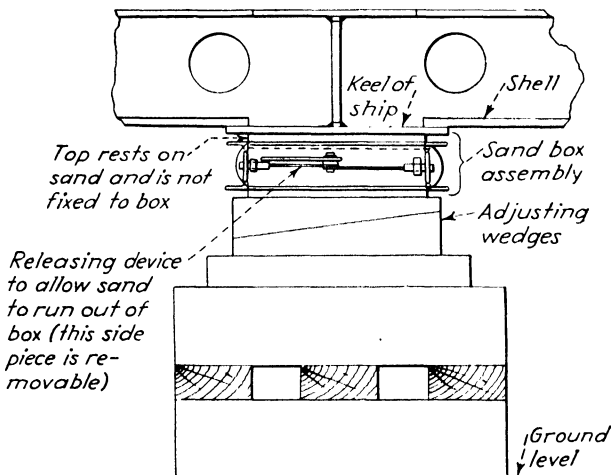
Keelblock assembly with a quick-releasing sandbox.
